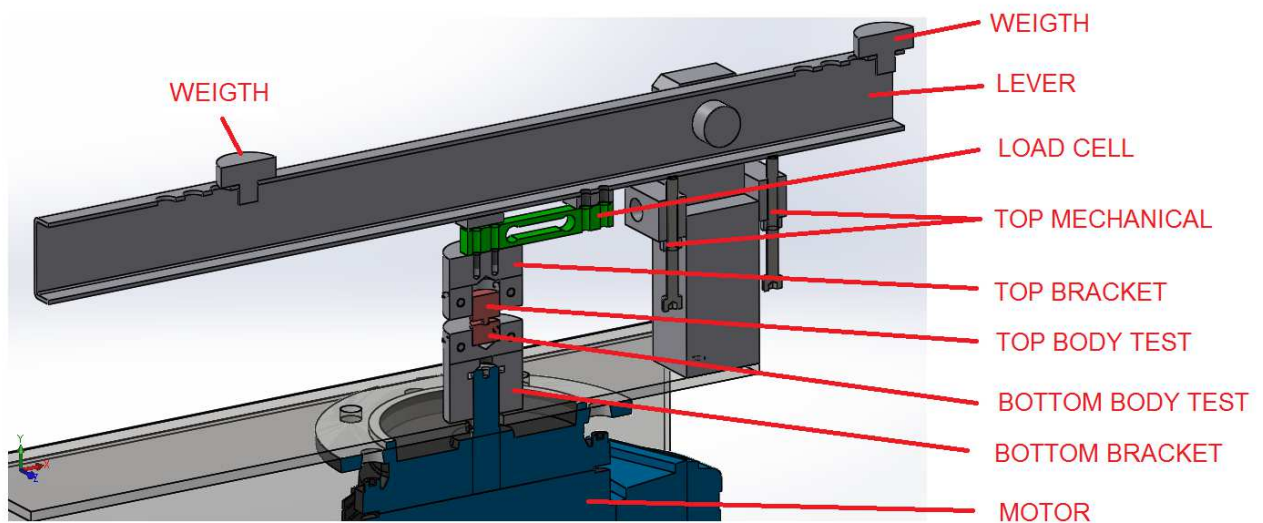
Assembling section with details of Lever, Weight, Motor and Load Cell locations.
